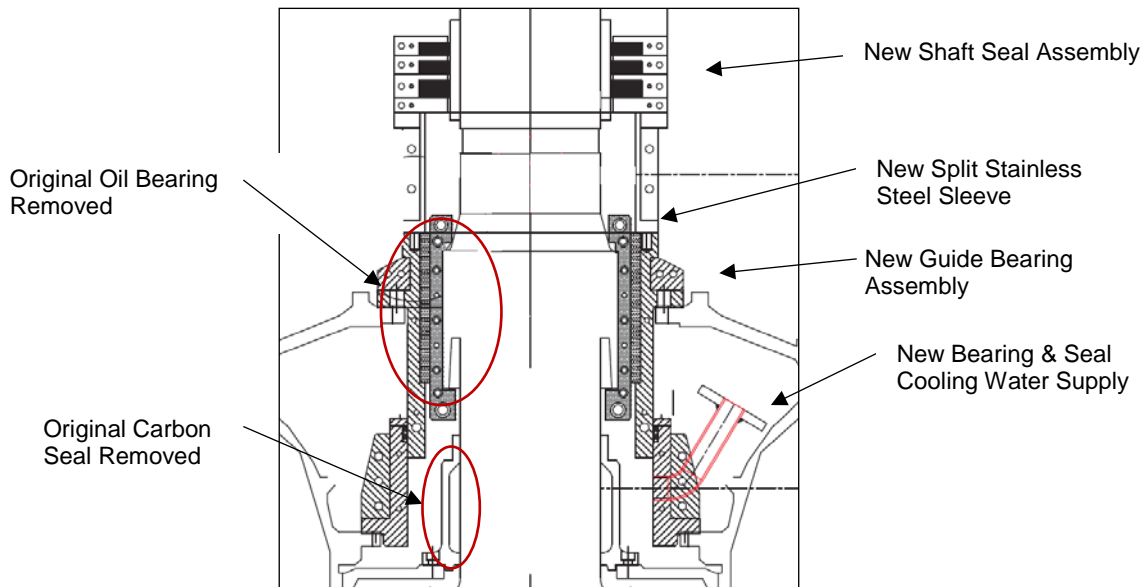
New Water Lubricated Bearing & Shaft Seal
